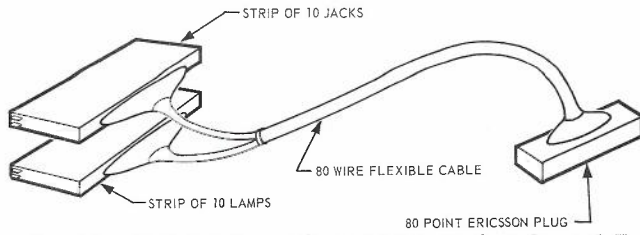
Line Unit for Connecting Cabling to Switchboard Face.
